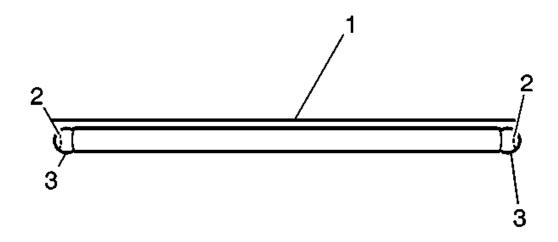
Inspecting Push Rods For Damage Courtesy of GENERAL MOTORS CORP.
